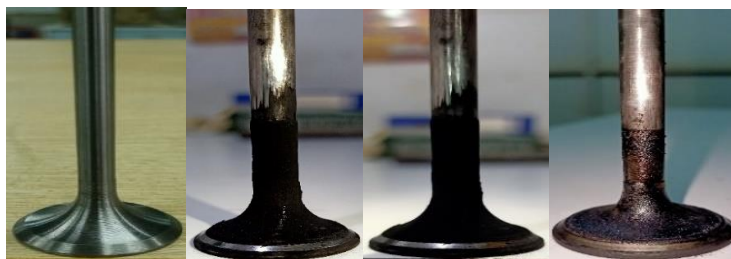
Deposits on the valves via (a) Fresh valve (b) DF(c) DF90WCO10 (d) DF70GO15Pn15.
